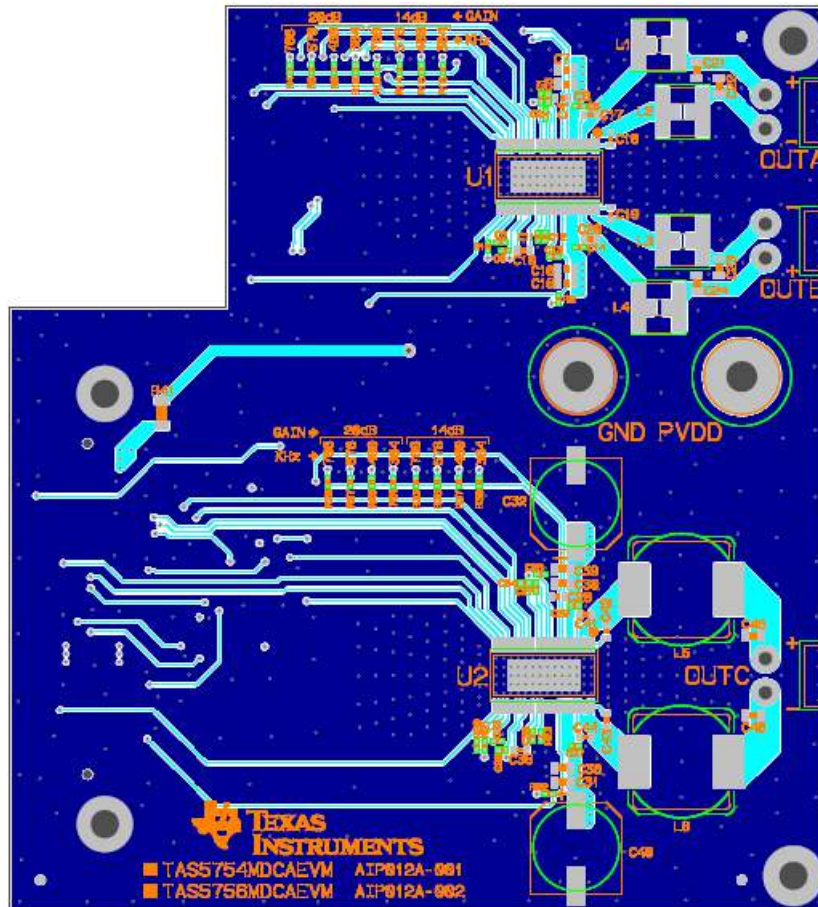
TAS5754/6MDCAEVM Top Composite Assembly
